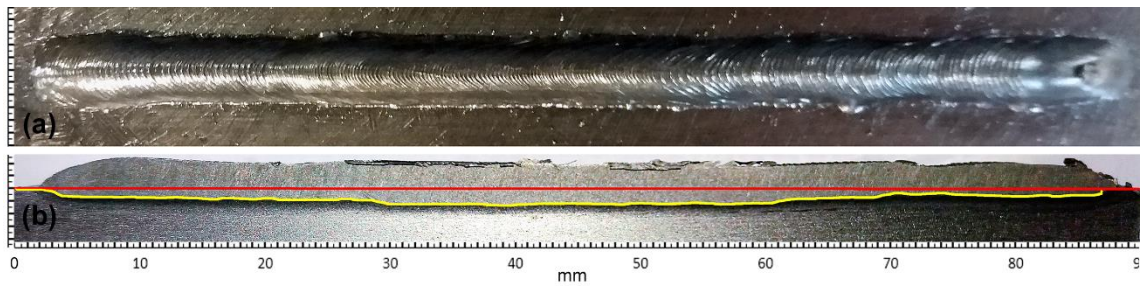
Weld bead obtained in the experiment 1: (a) Top view of the weld bead; (b) Weld bead depth profile (yellow line) and surface of the workpiece (red line) obtained by the macrographic analyses algorithm.
